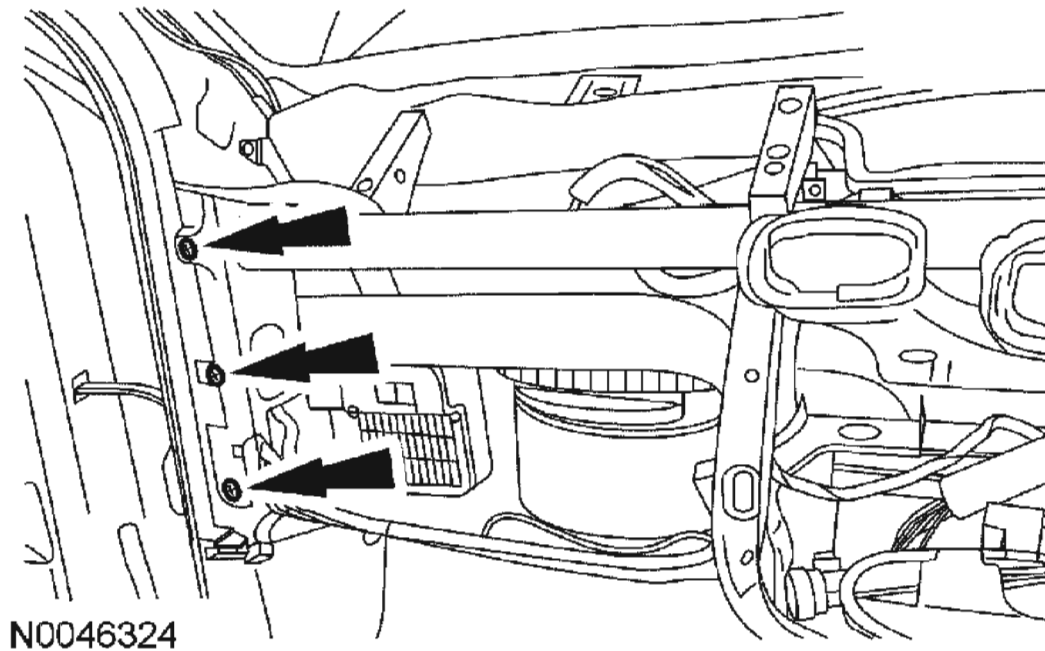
Removing LH In-Vehicle Crossbeam Bolts
